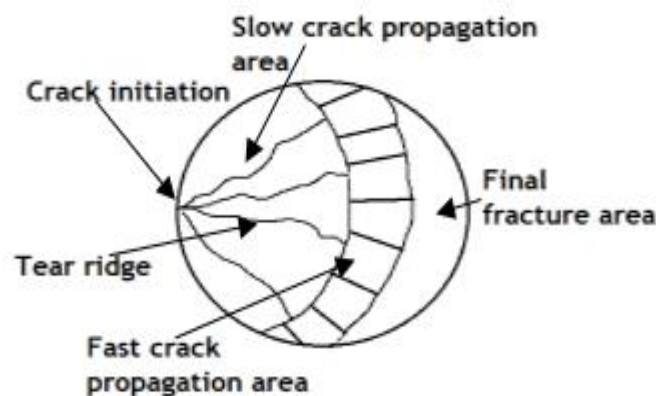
Schematic representation of a typical HCF fracture surface.
